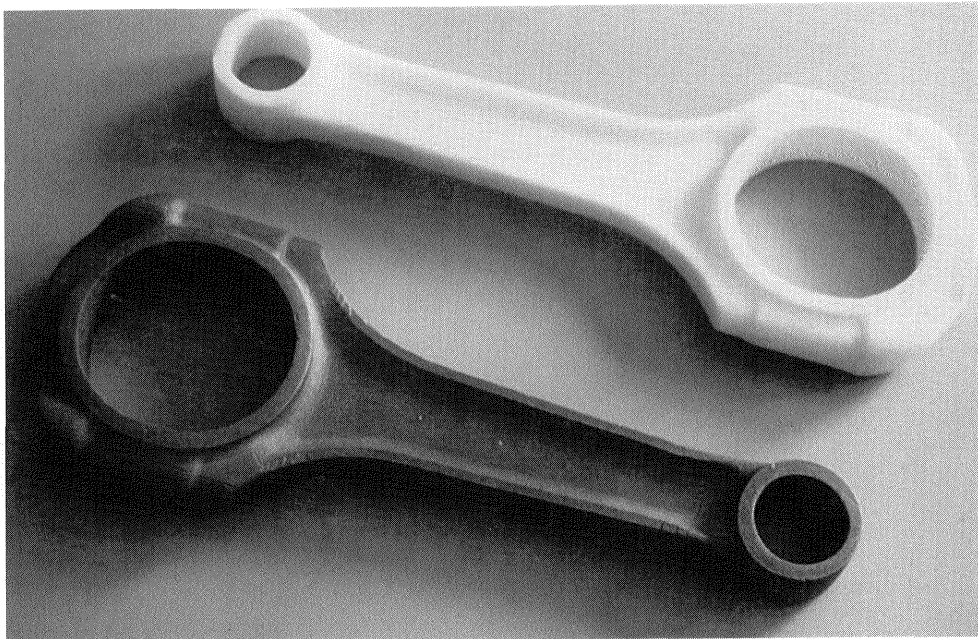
Laser sintered model of a connecting rod out of the polymer mixture and investment casting in Al
